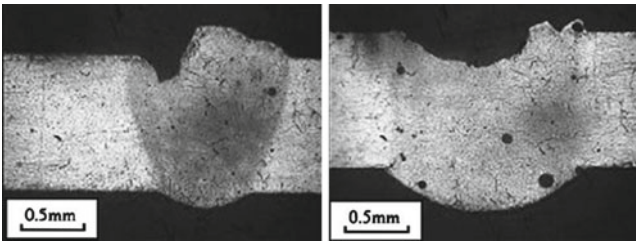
Weld defects in AZ31. a Side cut, and b melt drop out [32]
